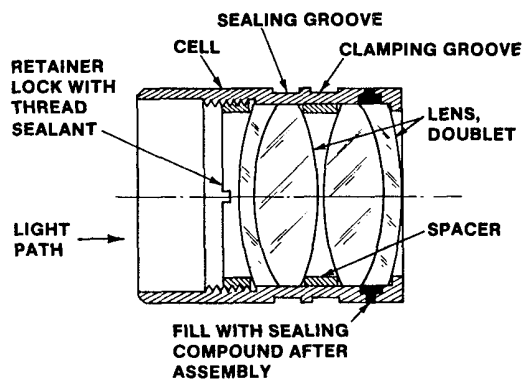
Example of a fixed focus eyepiece subassembly for a military telescope.
